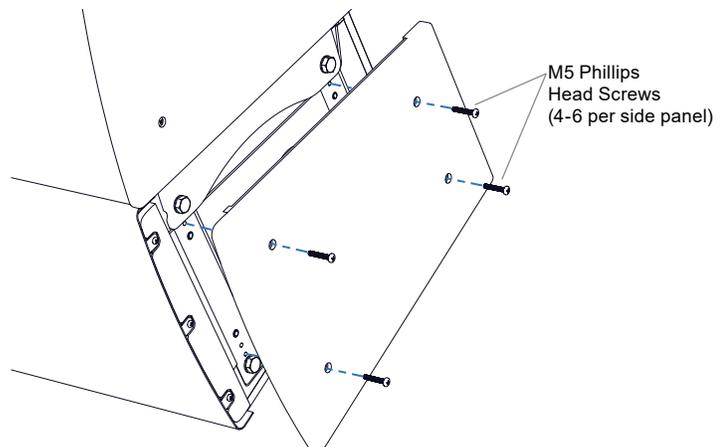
Attach side panels after all bracket connections / hardware has been installed
